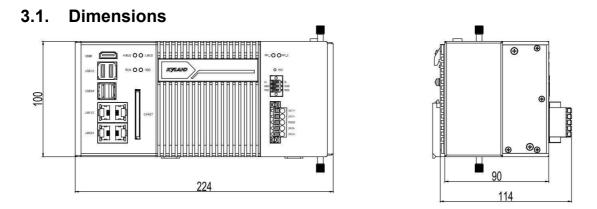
shows the dimensional drawing of the card track (unit: mm).
